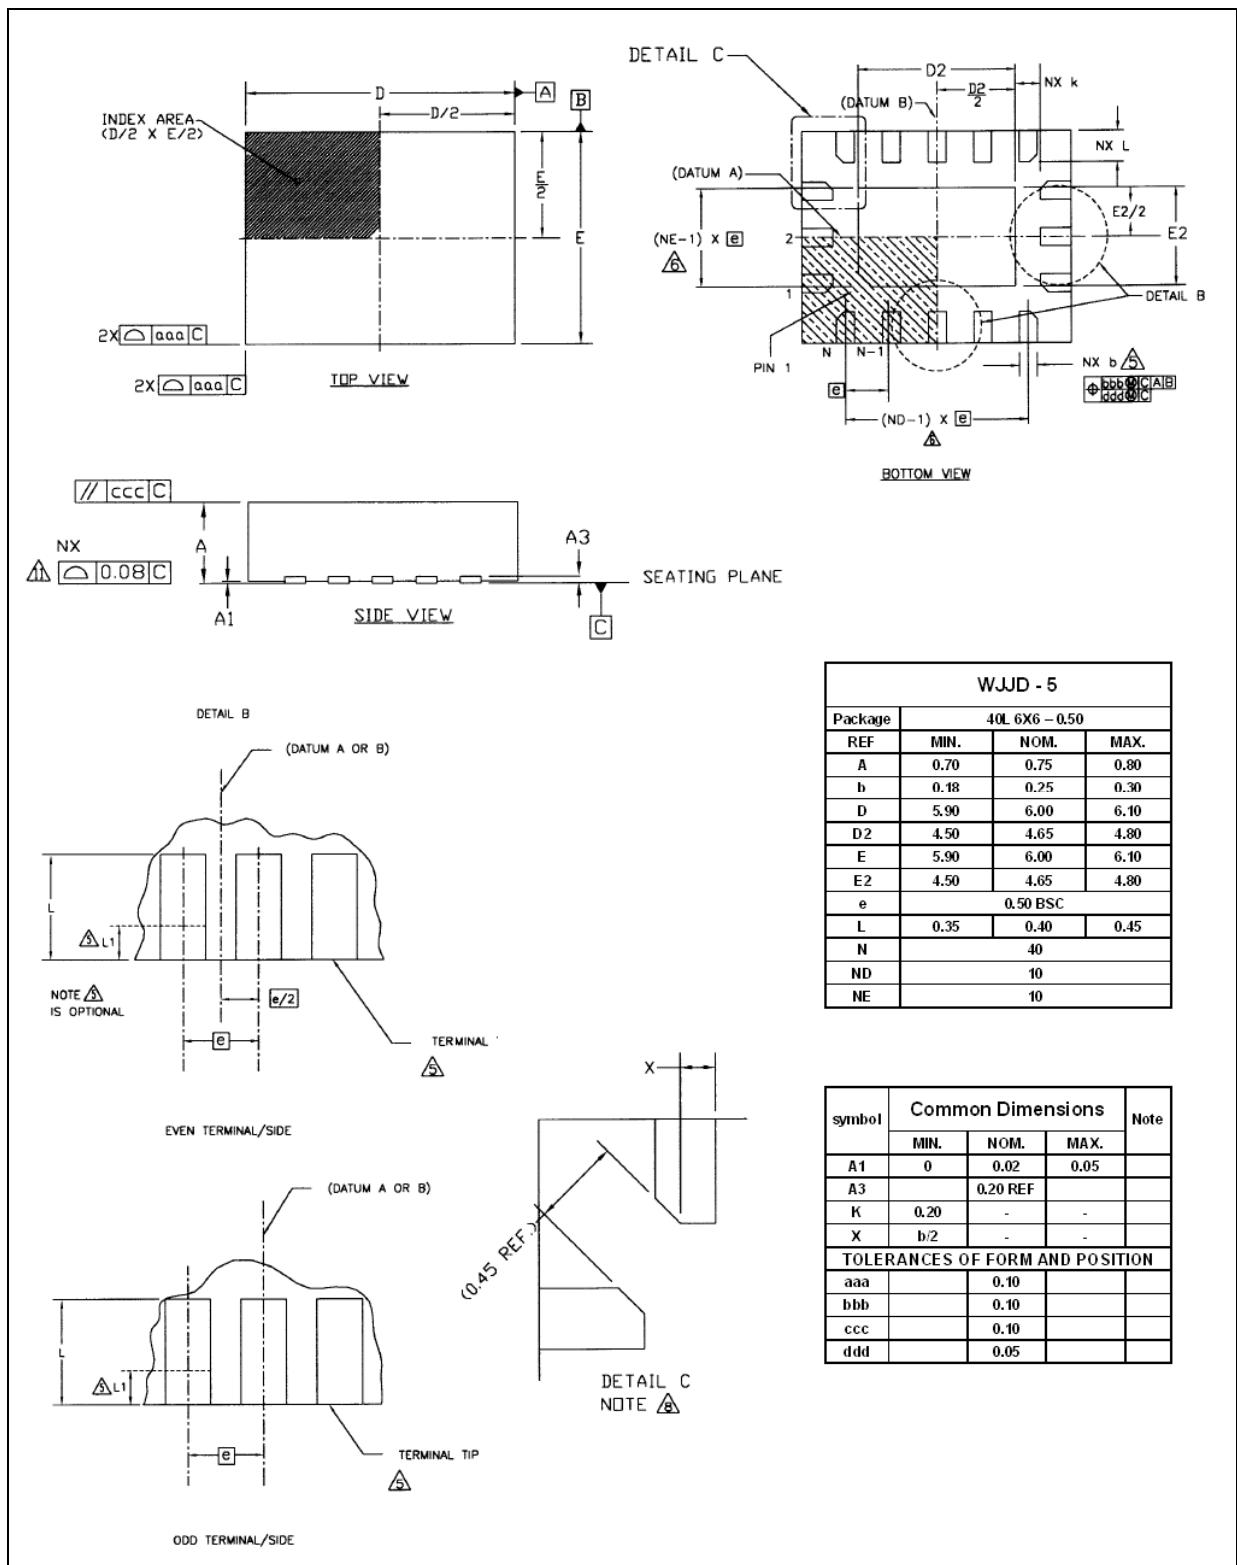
FM17XX 40-Pin QFN Package Dimensions
